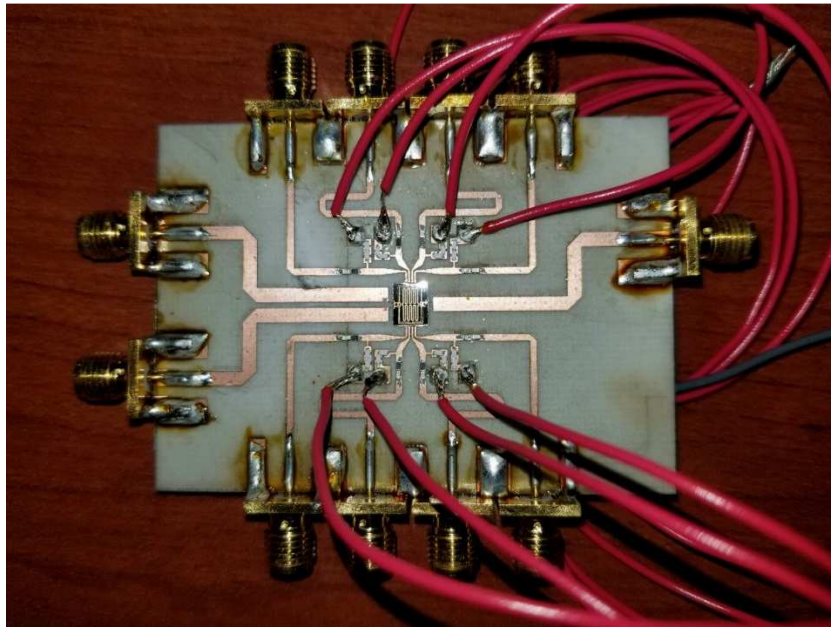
PCB assembled with the GaN MMIC circulator and COTS parts to realize the off-chip bootstrapping circuit.
